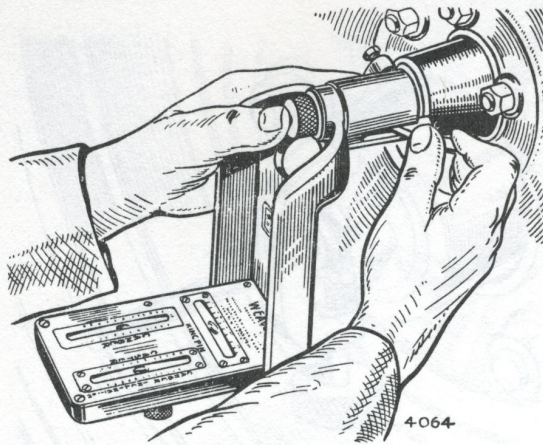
Clamping adaptor sleeve and gauge to spindle
